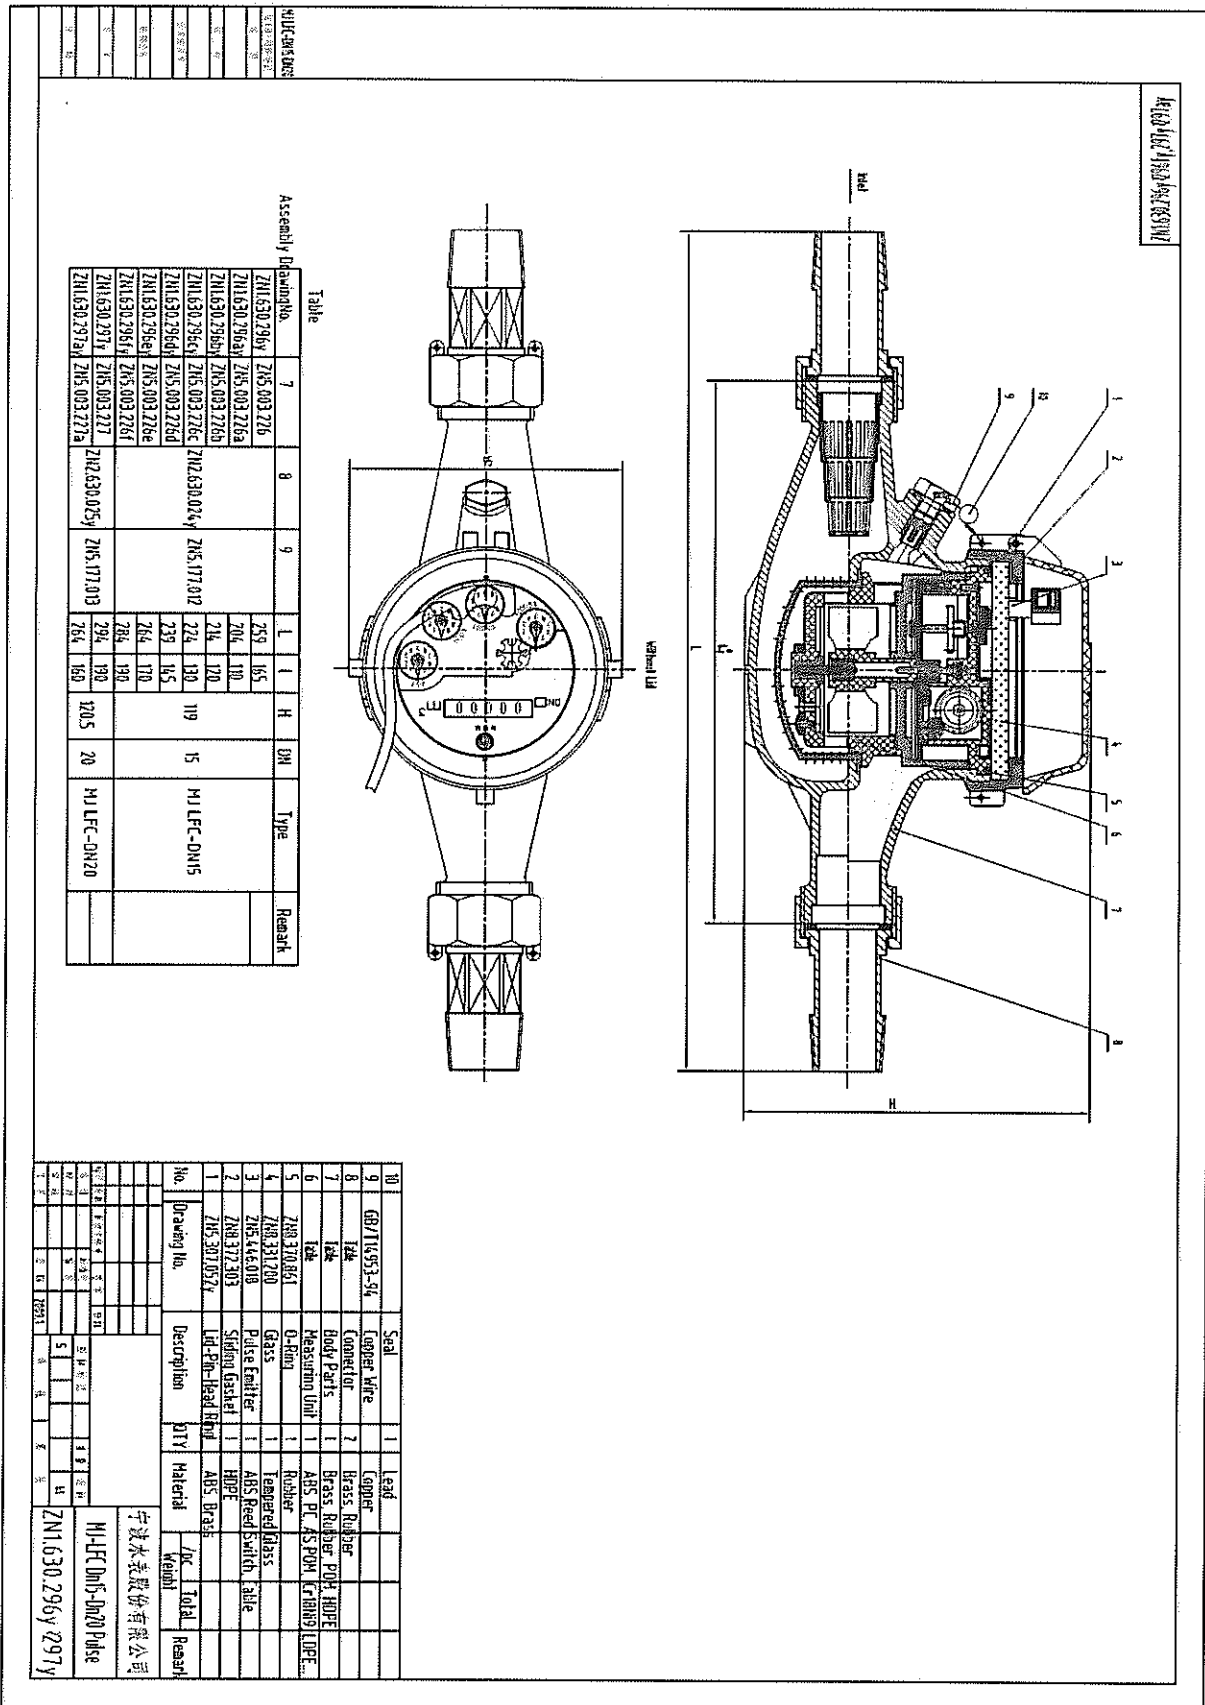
The water meter type MJ-WDC with reed impulse transmitter assembly drawings:
